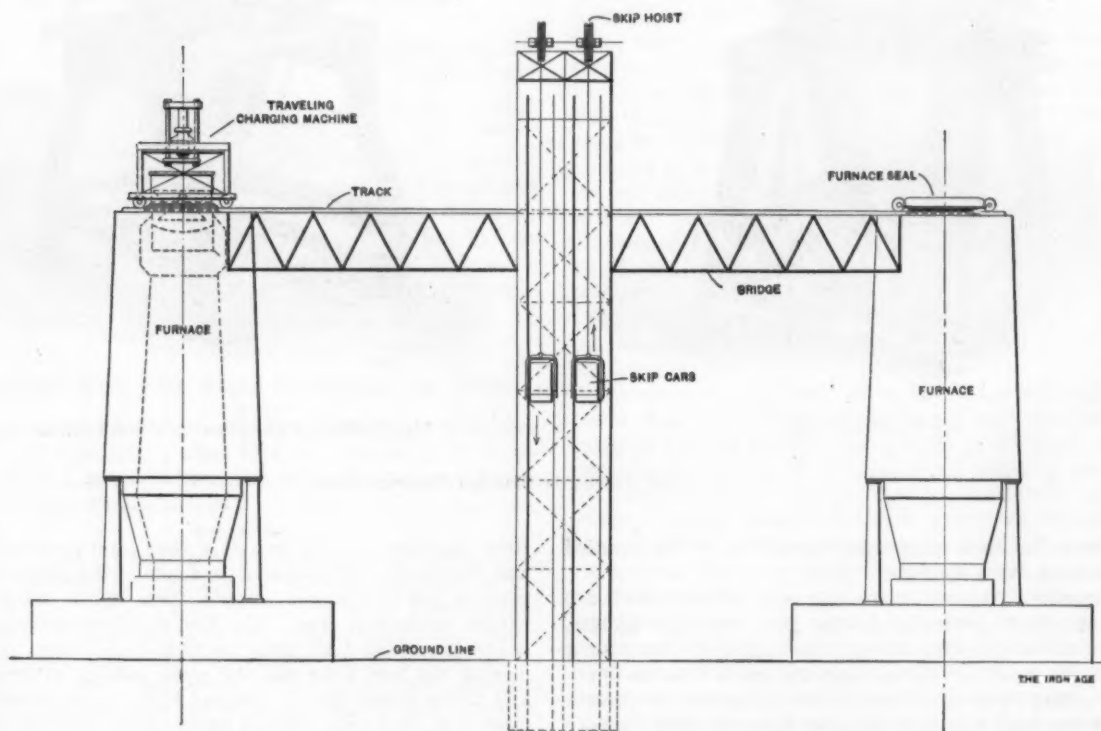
Arrangement for Serving Two Furnaces with One Traveling Charging Machine.
